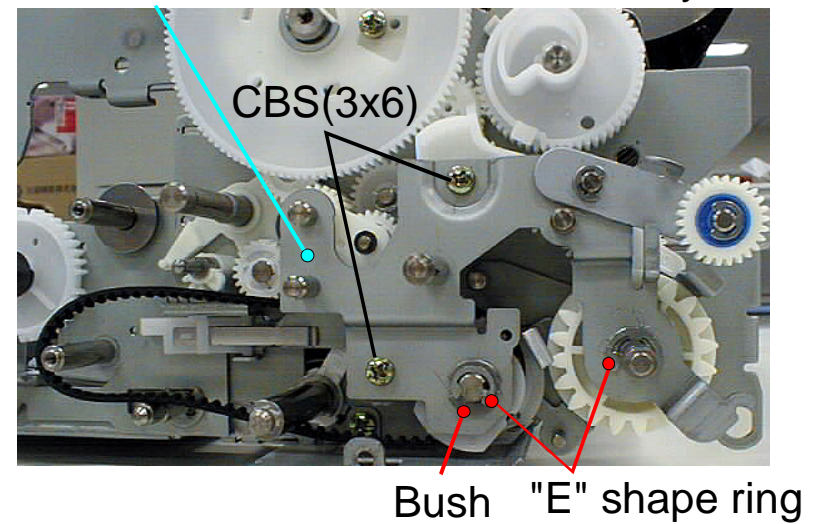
Installing "Lifter Gear Train Cover Assembly"
